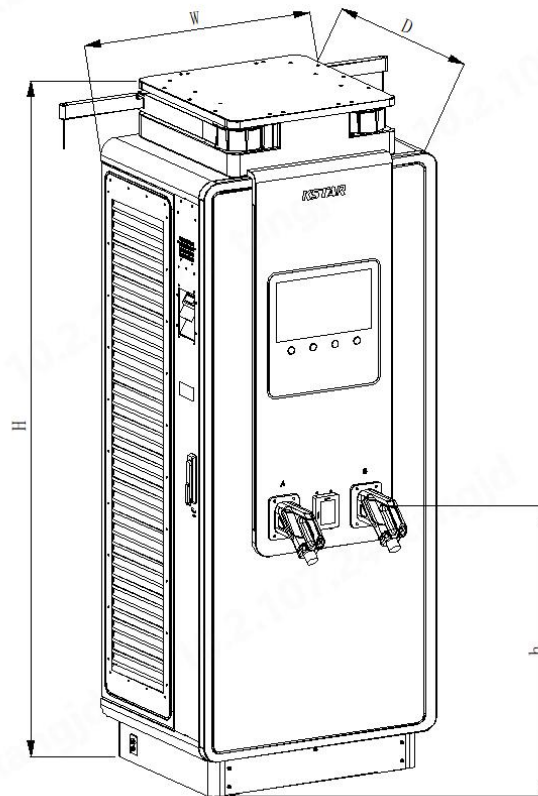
Diagram of Appearance Dimensions (unit: mm)
